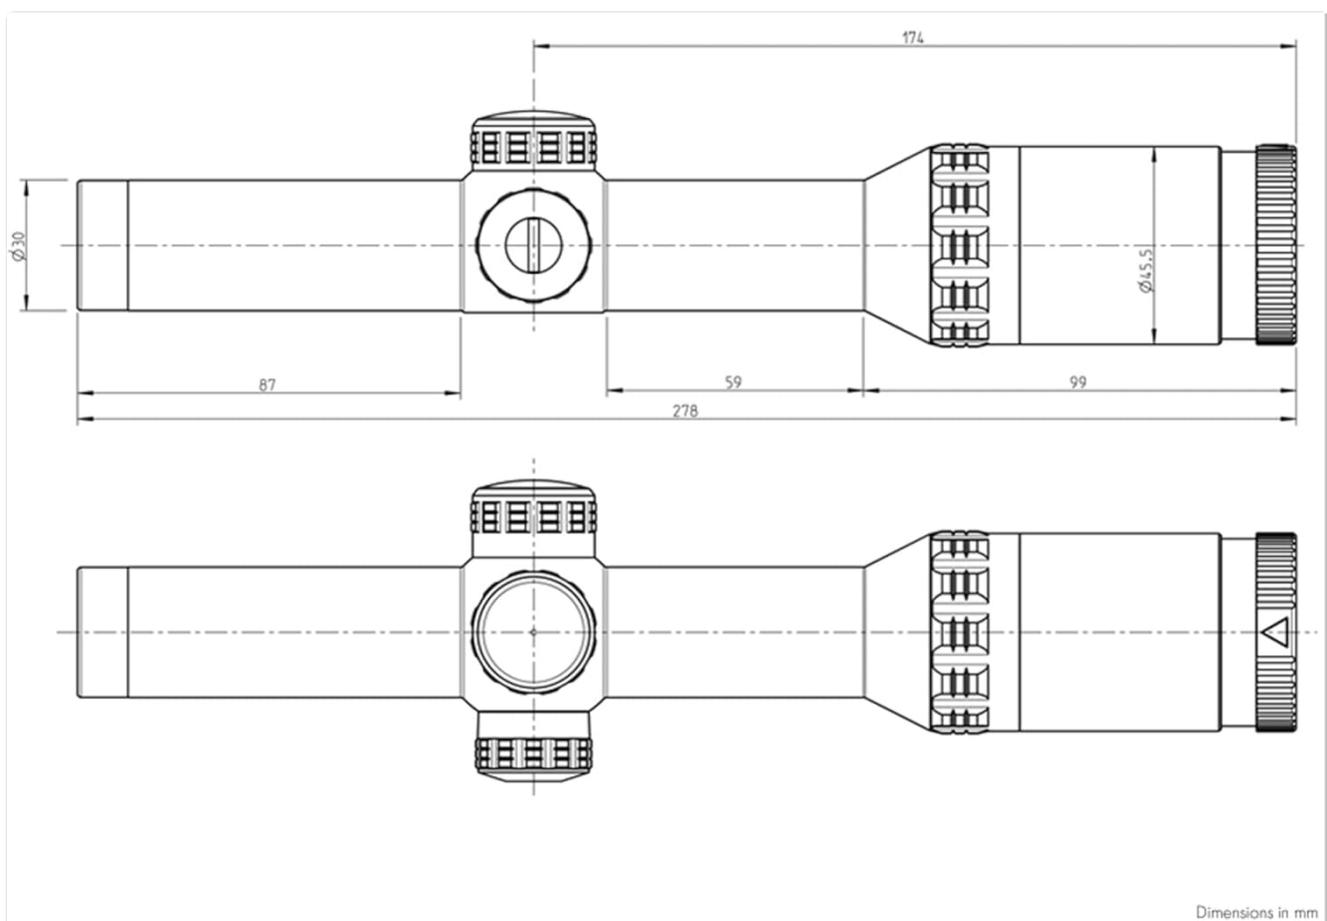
Technical drawing illustrating the dimensions of the KAHLES Helia 1-5x24i Riflescope in millimeters.
